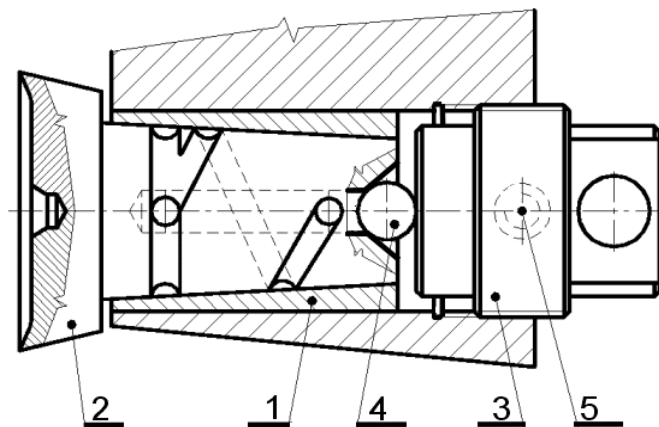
Scheme of minimum radial clearance setting and sliding surfaces of rotary cutting part planing tool.
